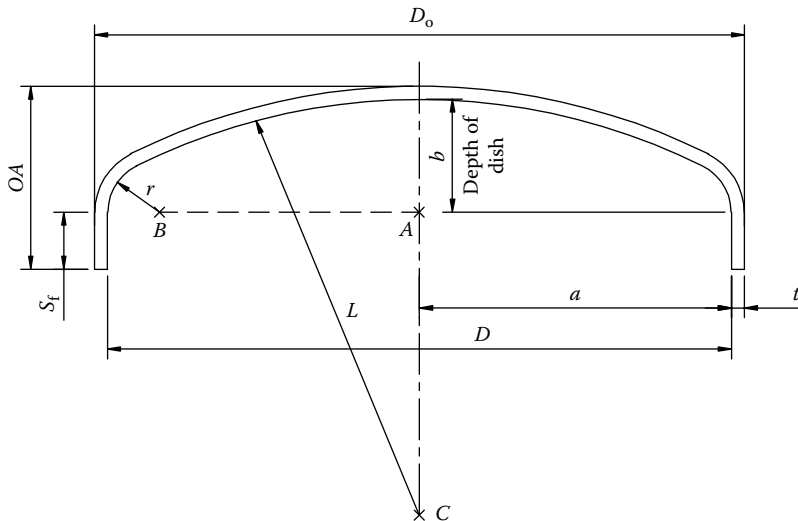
Dimensional details of flanged and dished torispherical head.
